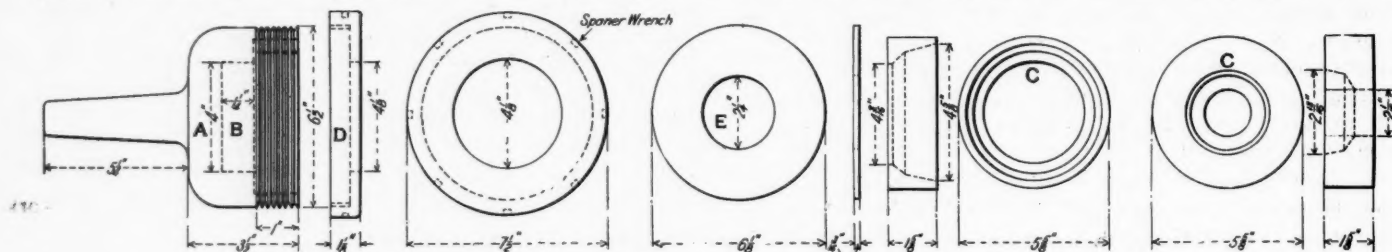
Lathe Chuck for Holding Metallic Packing When Boring to Size.
